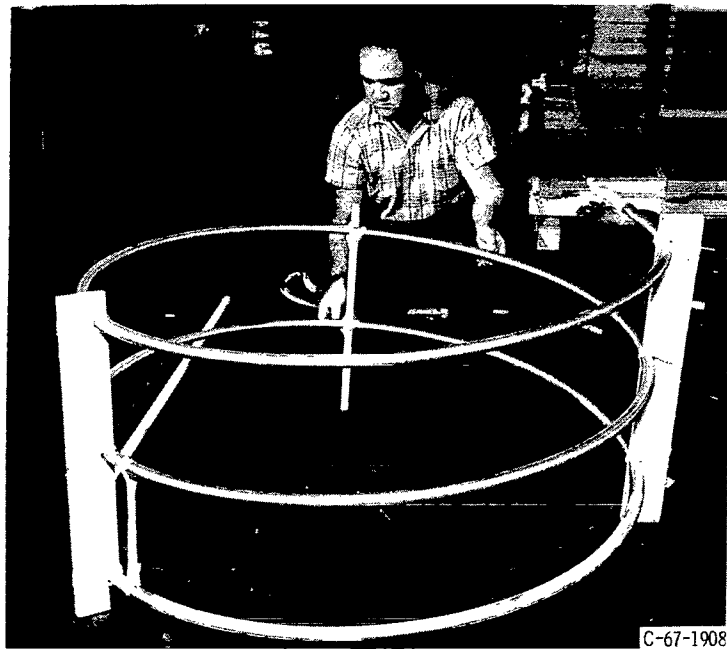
Method used to establish pitch on tantalum/stainless-steel tube assemblies.
